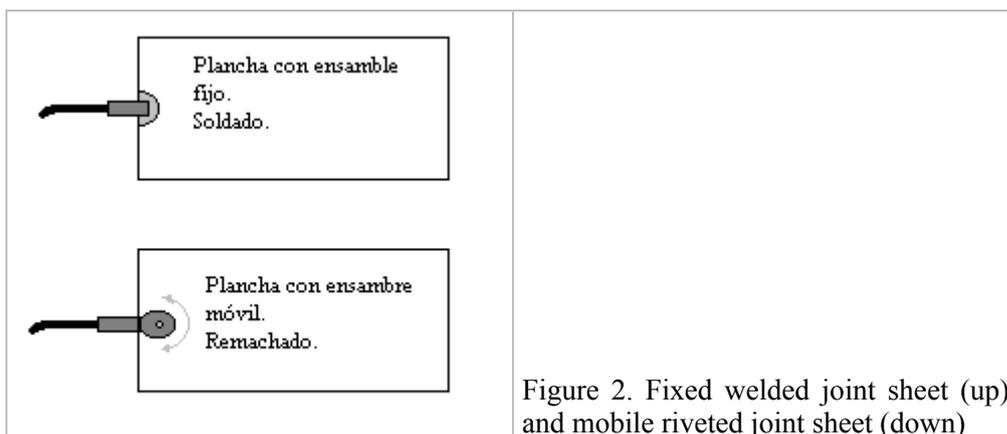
Fixed welded joint sheet (up) and mobile riveted joint sheet (down)
